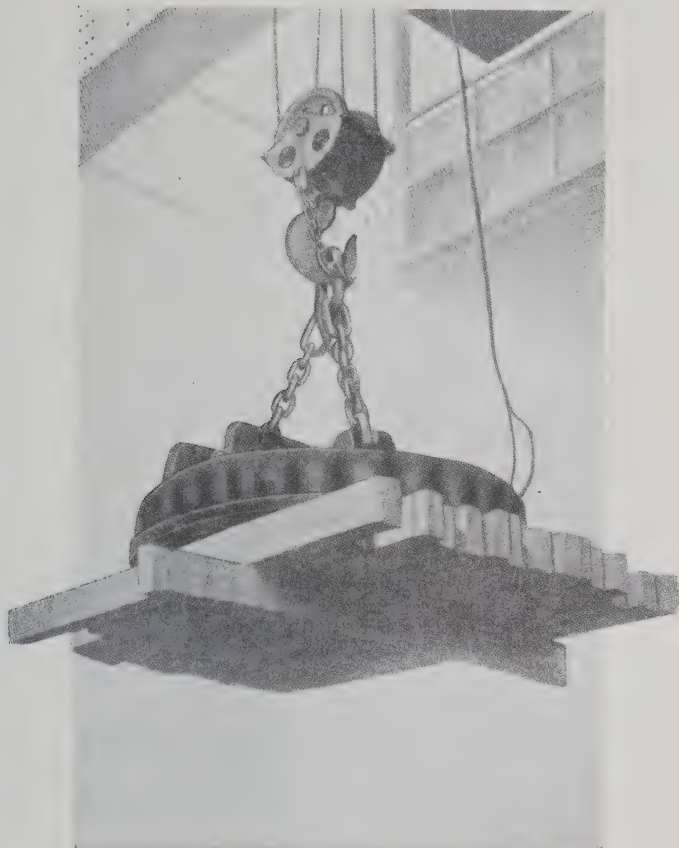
A 62-inch Lifting Magnet, Made by The Cutler-Hammer Co., Milwaukee, as Used in a Steel Mill with a Load of Steel Billets, Total Weight 8925 Pounds
